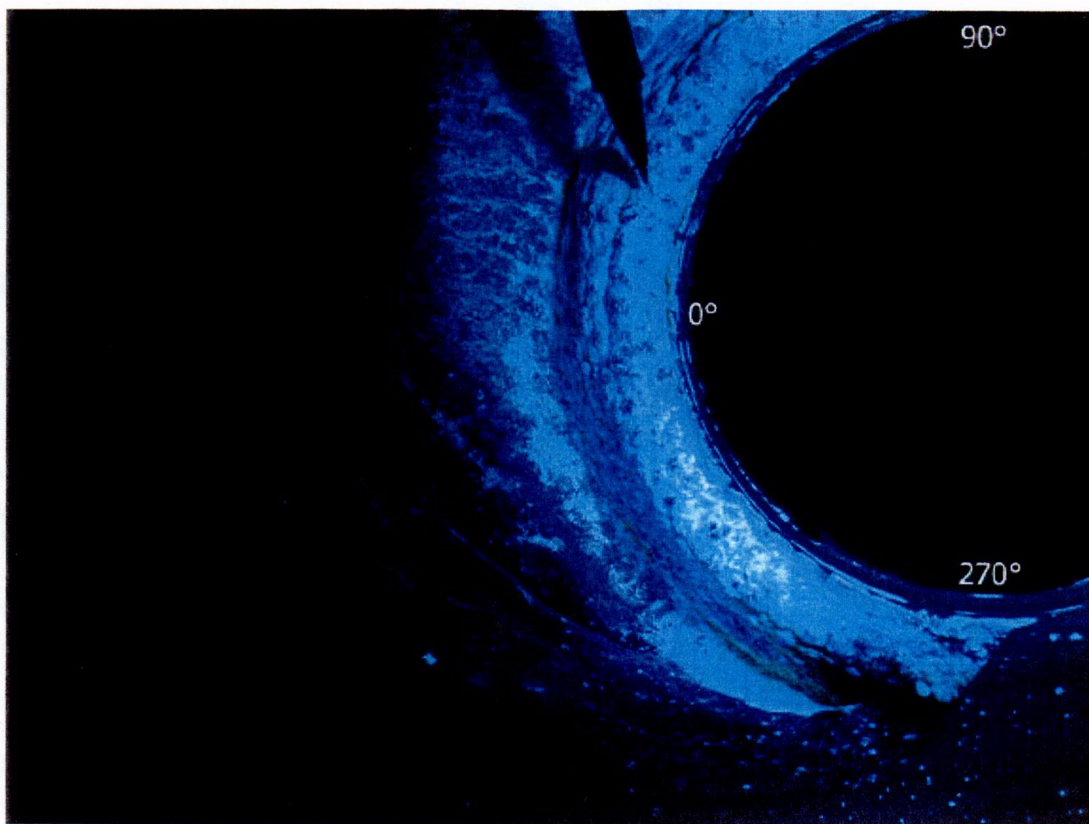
PT results for upper surface of exposed J-groove weld. The axial crack is visible near 10° (rough weld texture produced high PT background).
